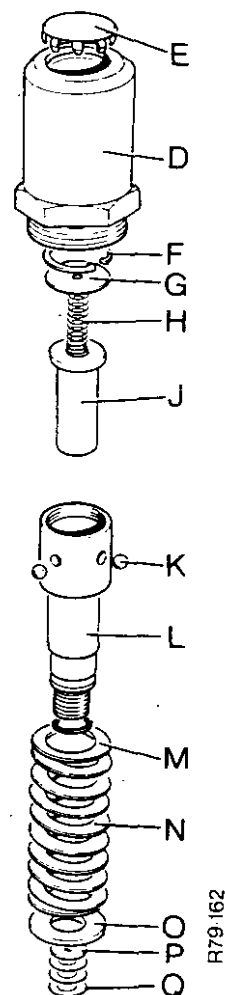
ASSEMBLING THE THROW-OUT MECHANISM
